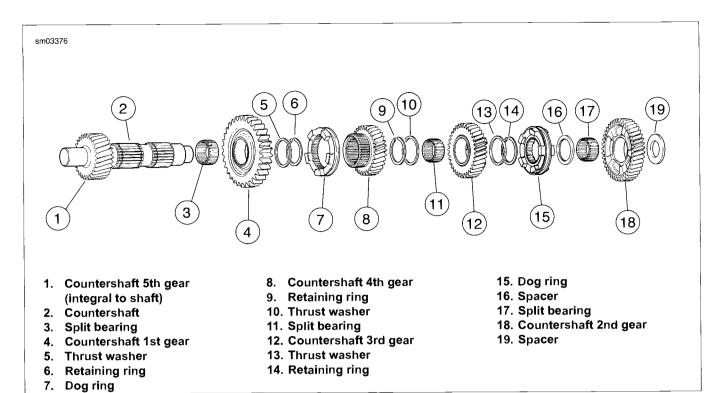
Transmission Countershaft Assembly Once Removed from Left Crankcase/Disassembly
